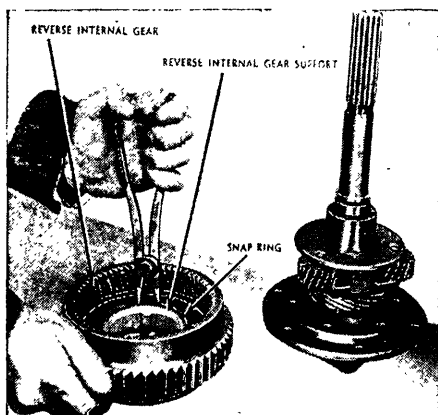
Remove snap ring and take off reverse internal gear support. Tap bearing from internal gear support. Remove snap ring from output shaft, keeping it spread to avoid damage to splines.
